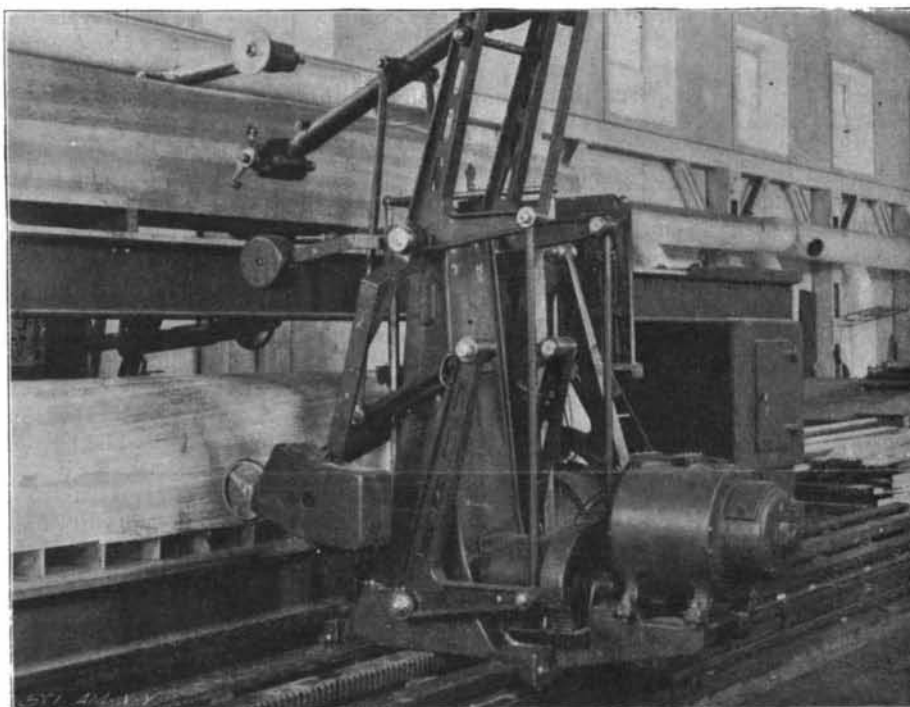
Model-Cutting Machine. ("Former" is Below, Model Above.)
